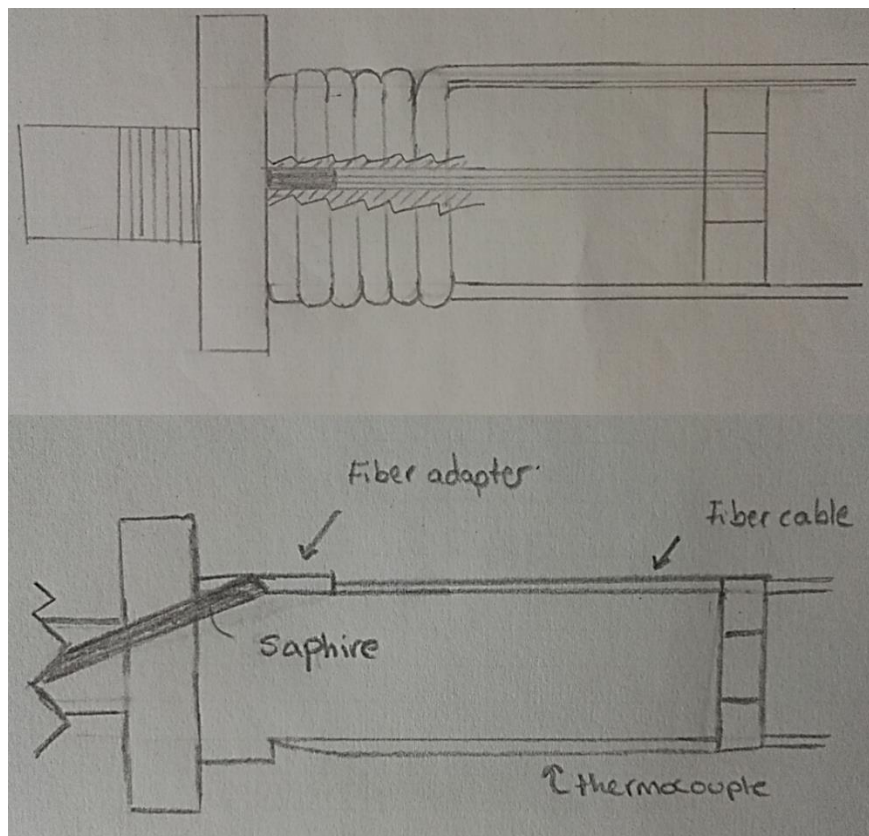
Model N°5; On the upper part the adapter with the copper coil is shown; on the lower part the measurement techniques
